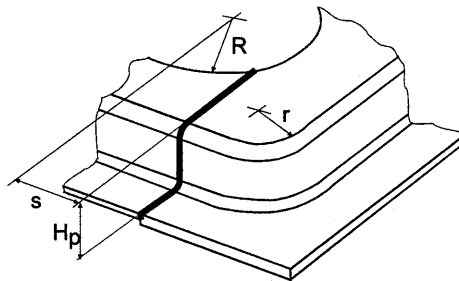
Definition of weld position (s), hole radius (R), product height (H_p) and corner radius (r) for the stretching tests
